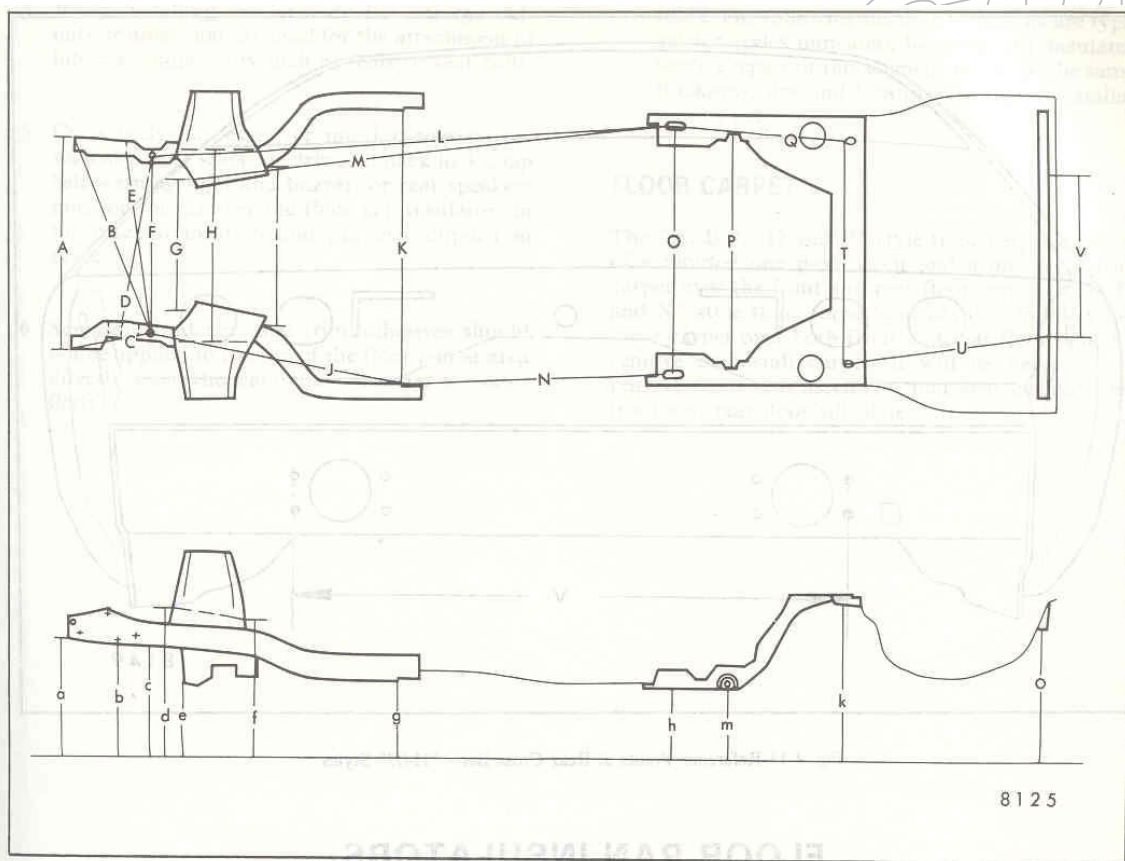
Horizontal and Vertical Checking Dimensions - "H-07" Styles
